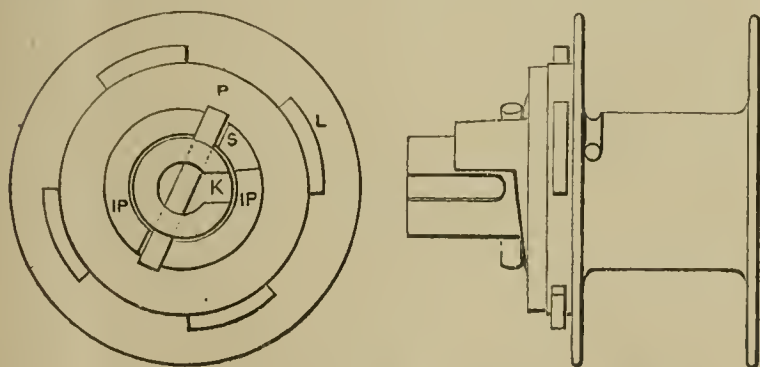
CONSTRUCTION OF WINDING DRUM.
